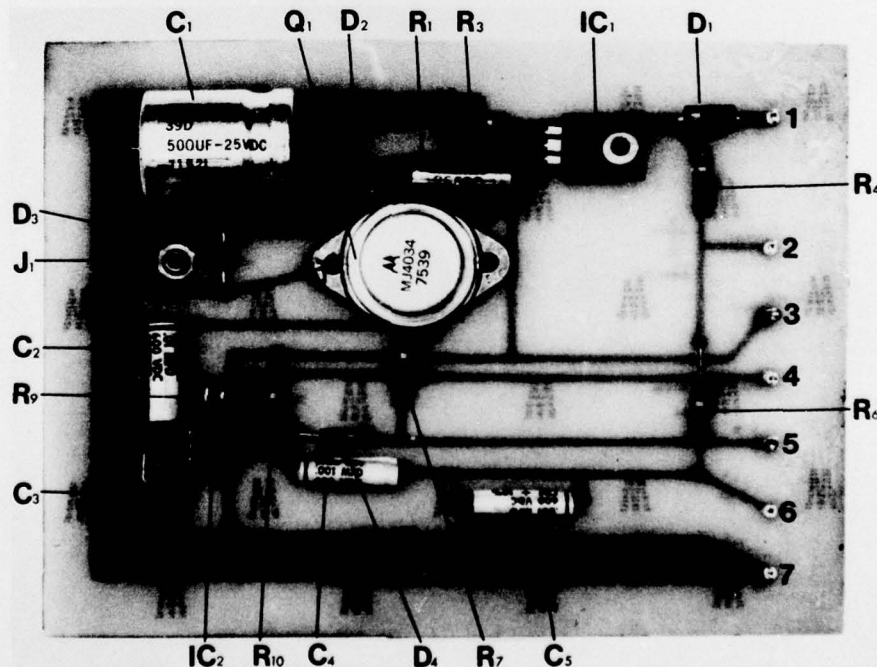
Circuit board parts layout. Part numbers refer to components in the electrical circuit, Fig. 4.
